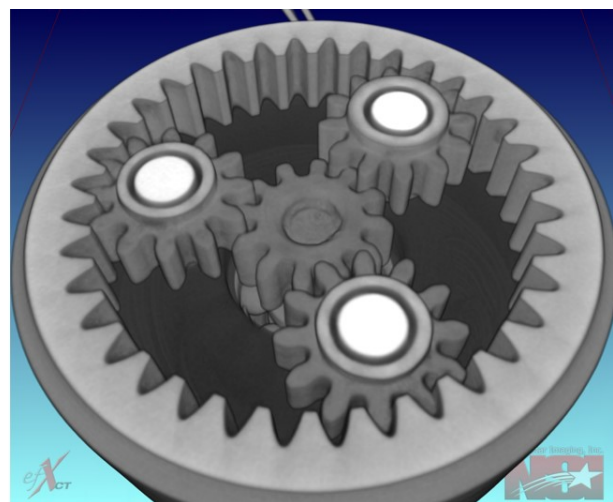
First Planetary Gear Stage with the Motor Pinion at the Center
